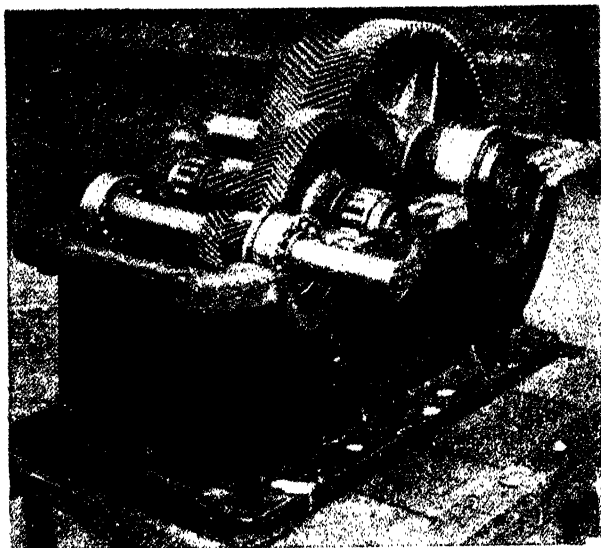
Herringbone Gear Reducer. *Courtesy Foote Bros. Gear and Machine Co.
